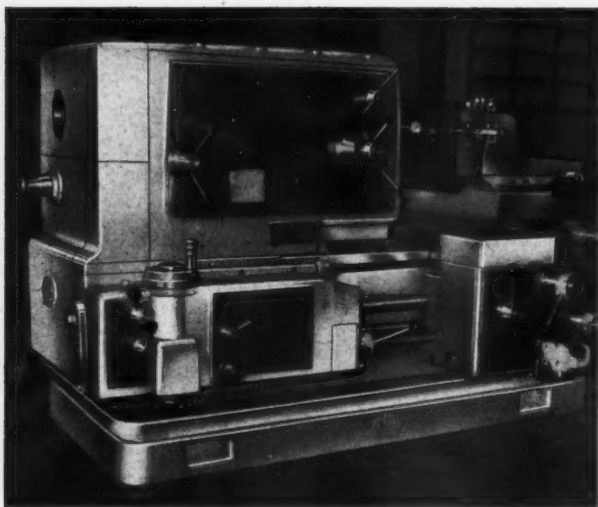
An IMOR type MHS lathe, of 450 mm. (17.716 in.) centre height, is here being checked for run-out of the spindle. The machine is fitted with a Synchronomatic feed gearbox
